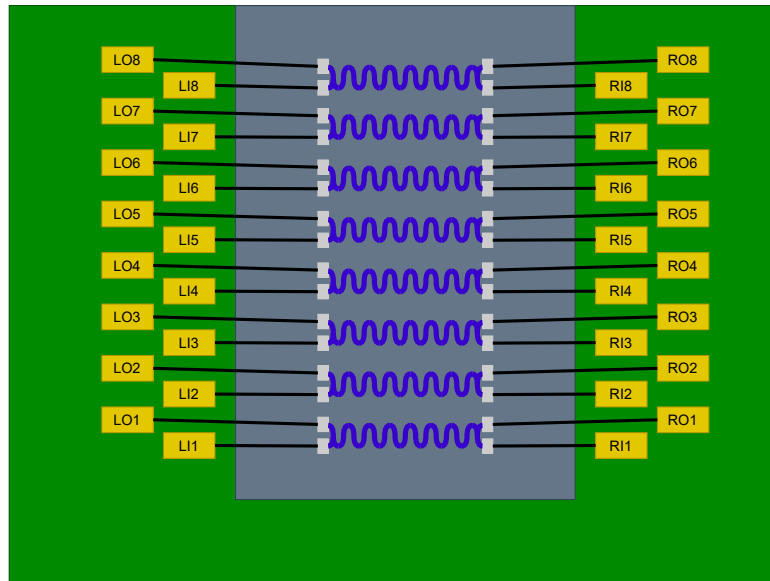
Diagram of the wire bonding connections from the thruster heaters to the PCB bonding pads. The nomenclature is L/R for left/right, I/O for inner/outer, and the heaters are numbered 1 through 8 from the inlet side to the outlet or nozzle side.
